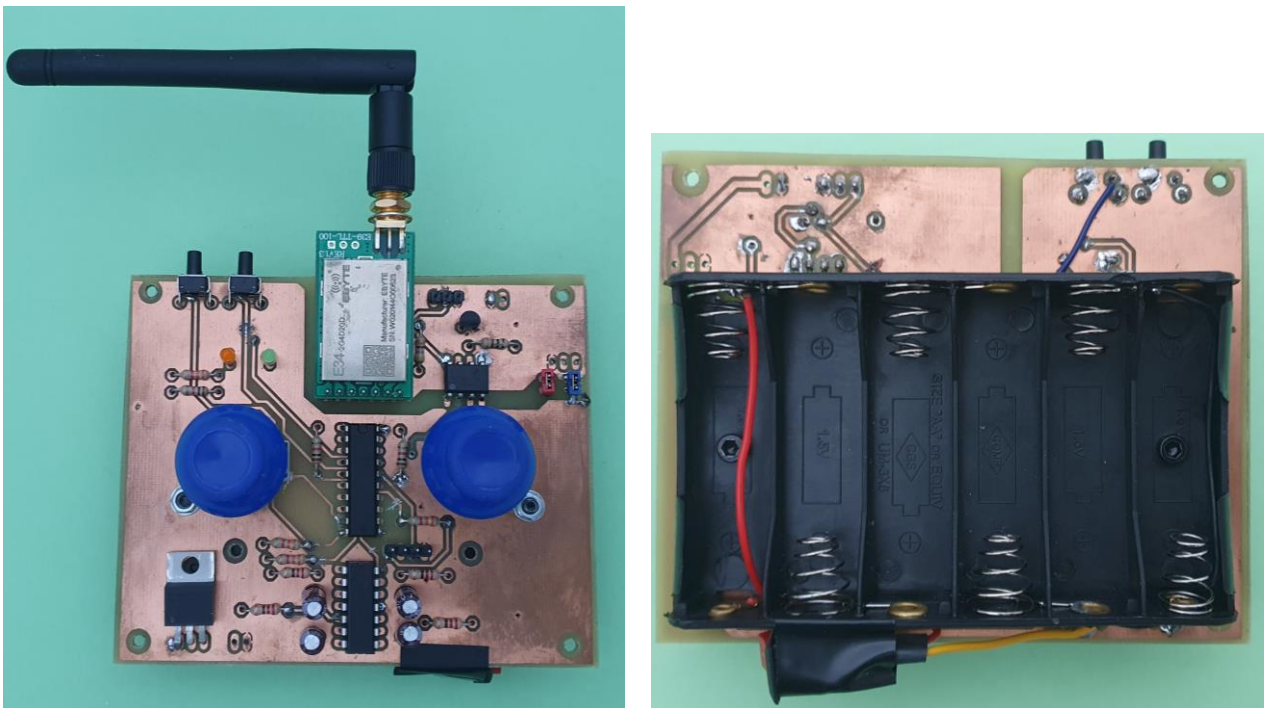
Assembled Remote Controller. Top view on the left. Bottom view on the right.
